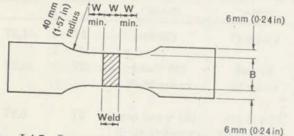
Specimen No. 3 Tensile Test for Joint
